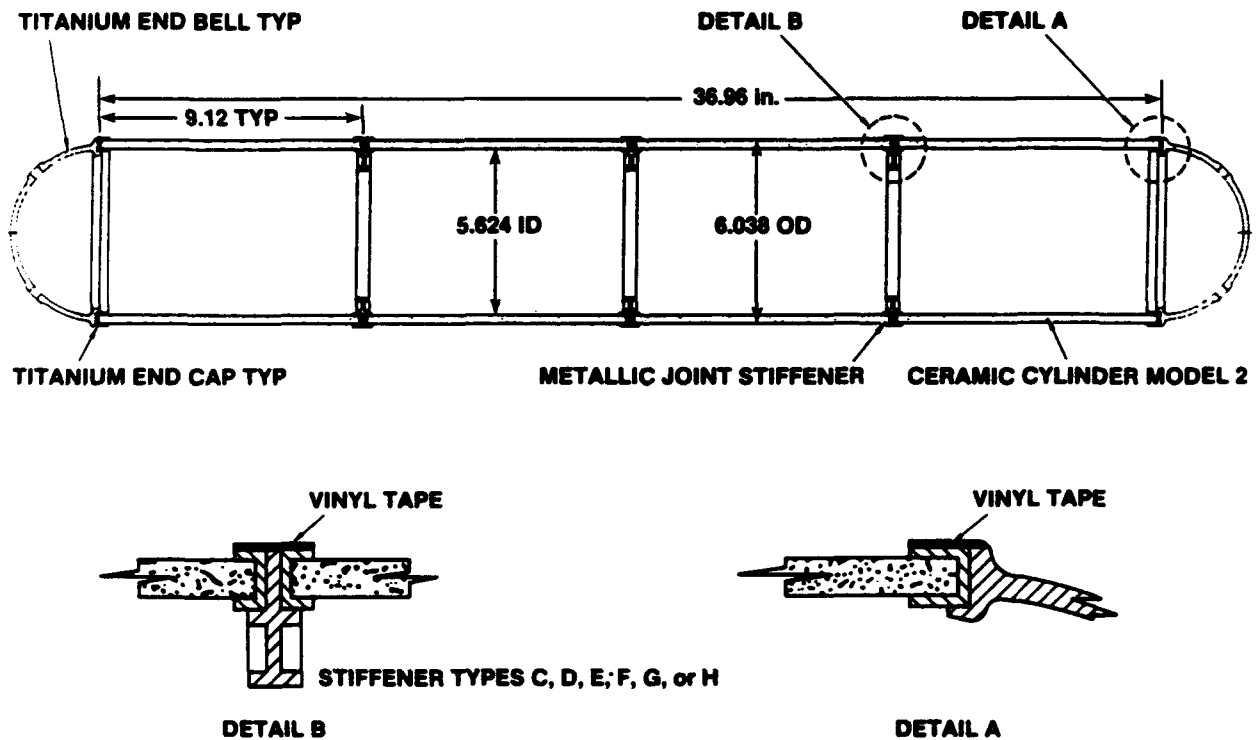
Joint stiffened ceramic housing assembly; Type W; 4 cylinder sections Mod 2.
